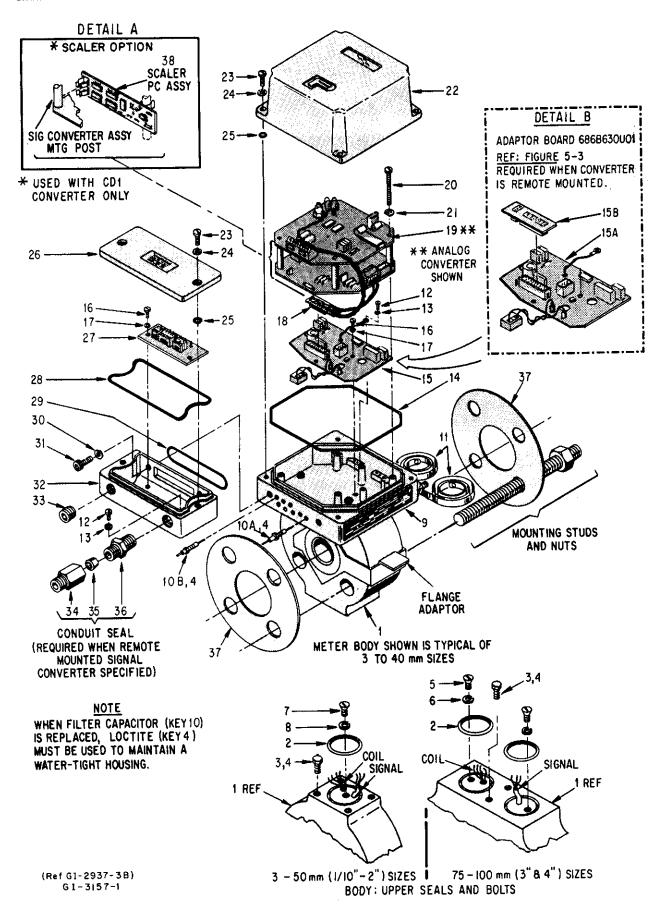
EXPLODED VIEW, BASIC FLOWMETER PARTS
